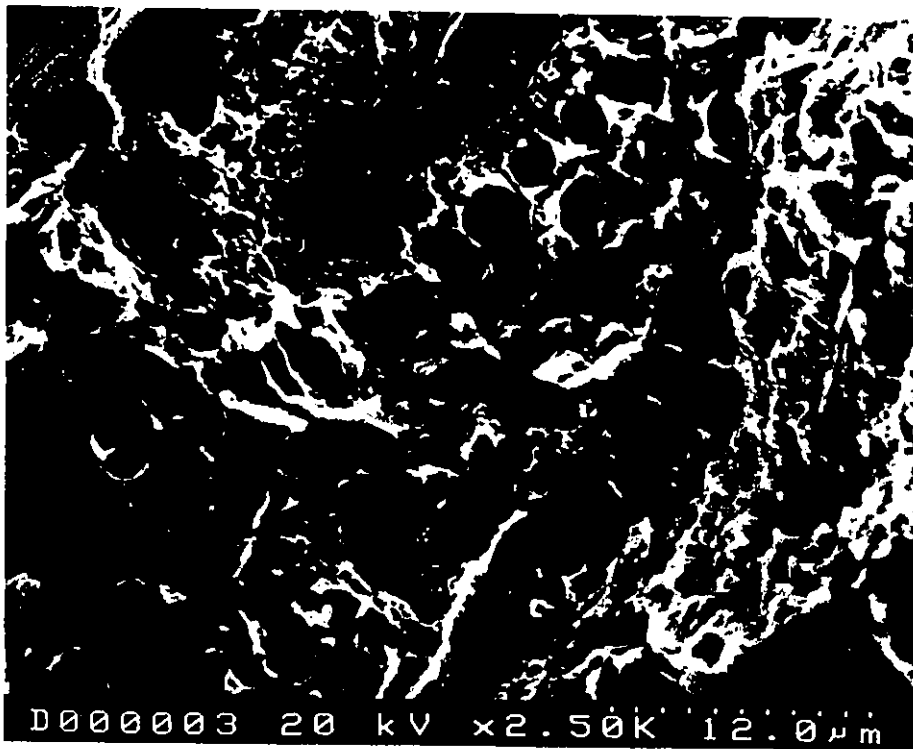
SEM Fractograph of Specimen 2 (Ductile Fracture Zone)
